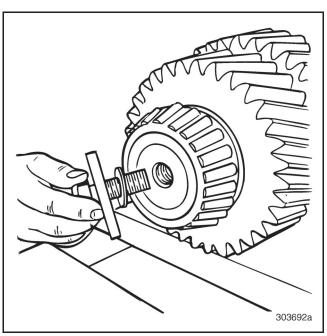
Installing Front Shim, Clamp Plate and Capscrew
